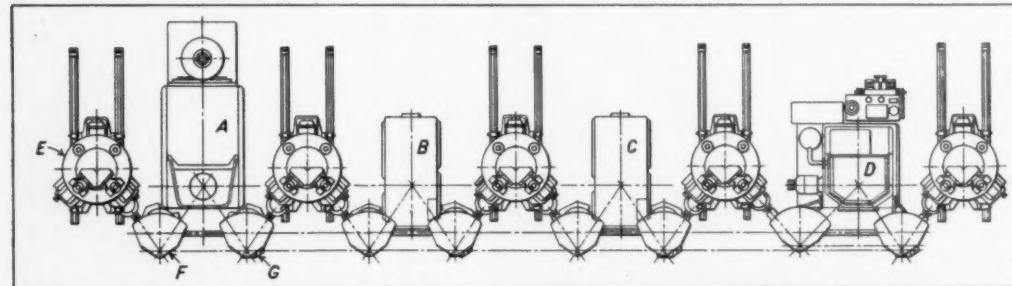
Plan View of Part of a New Line for the Production of Cluster Gears. A Hobbing Machine and Two Gear Shapers are Installed for Cutting the Teeth, and Workpieces are Transferred by a "Flexible" System, with Work Banks Installed Between the Machines
